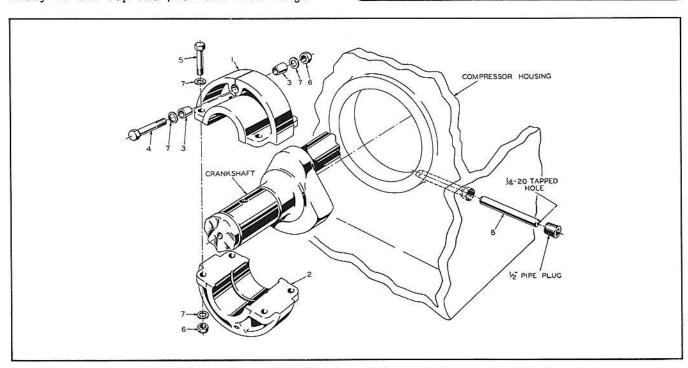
Center Main Bearing (12 and 16 Cylinder Only)
